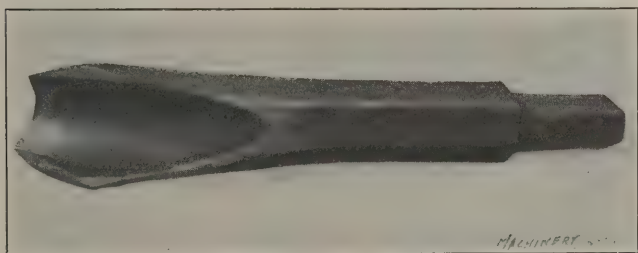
Gouge-shaped Chisel used for Rounding Corners
